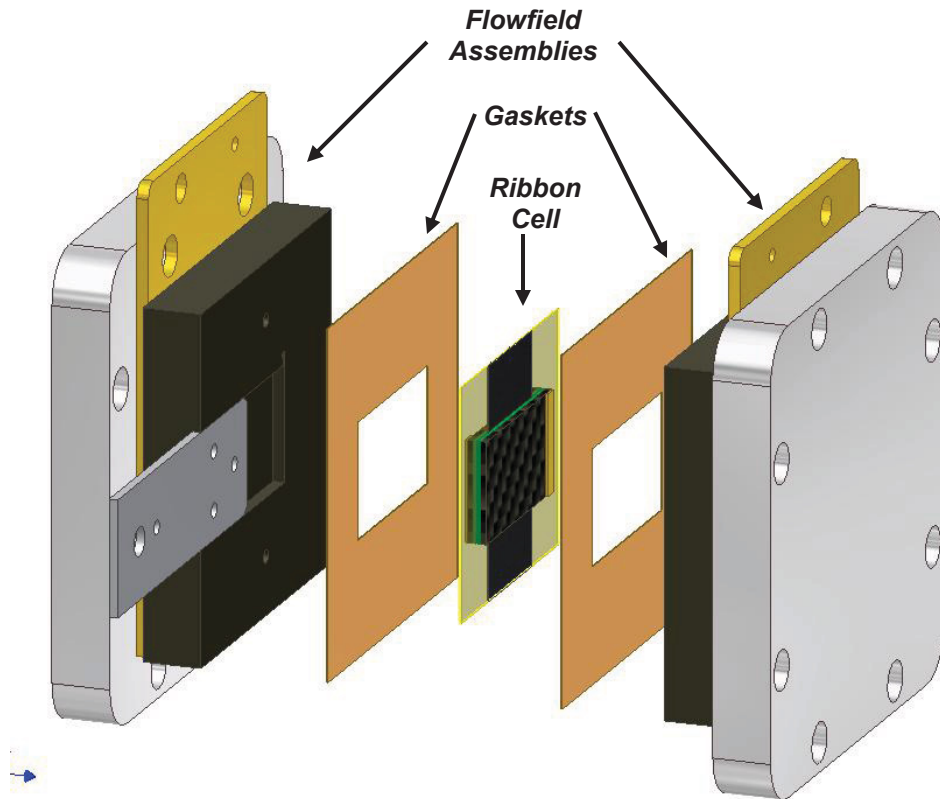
Exploded view of open flowfield fixtures with gaskets and Ribbon Cell.
